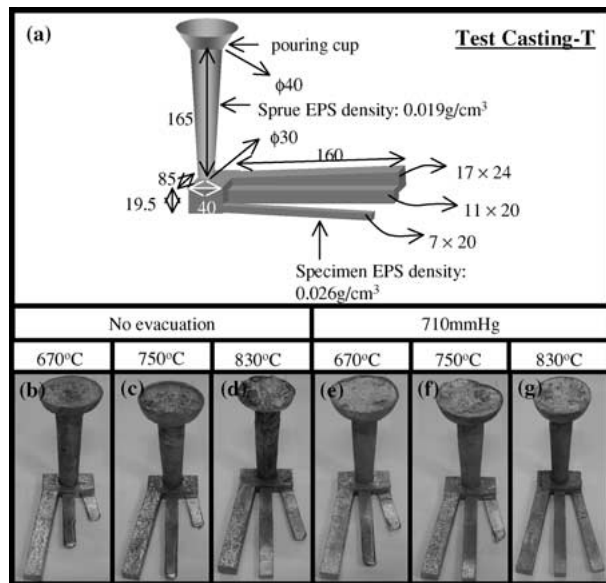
(a) The shape of the test casting-T by lost foam casting (unit: mm); (a) Dimension of casting; (b)–(g) shape of each casting under various casting conditions.
